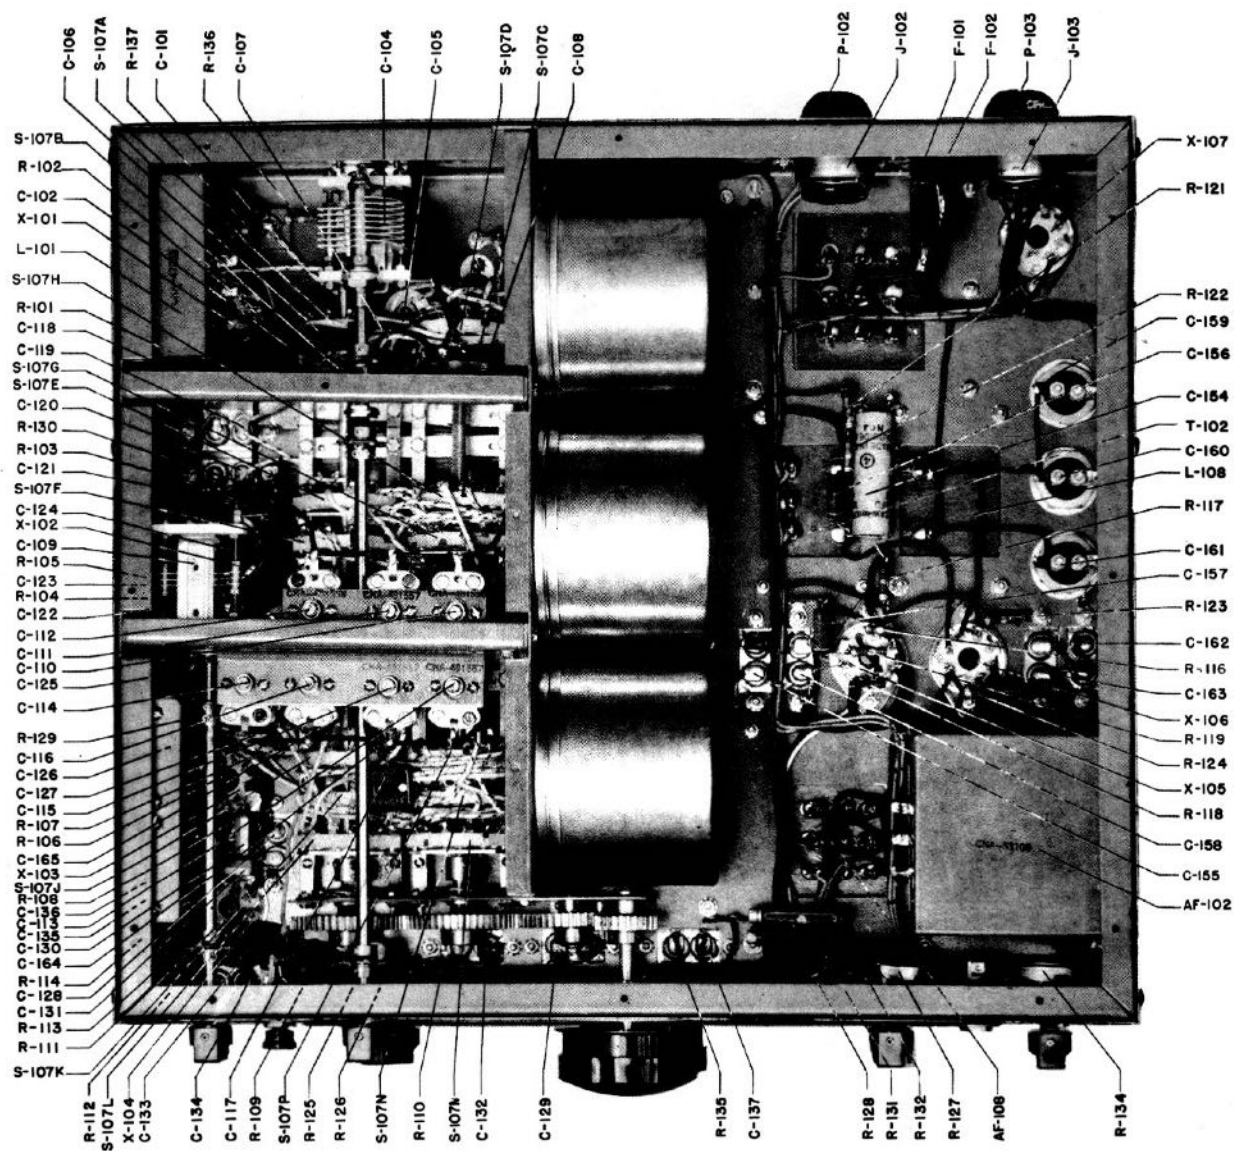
Bottom View of Type CNA-46161 Radio Receiver
